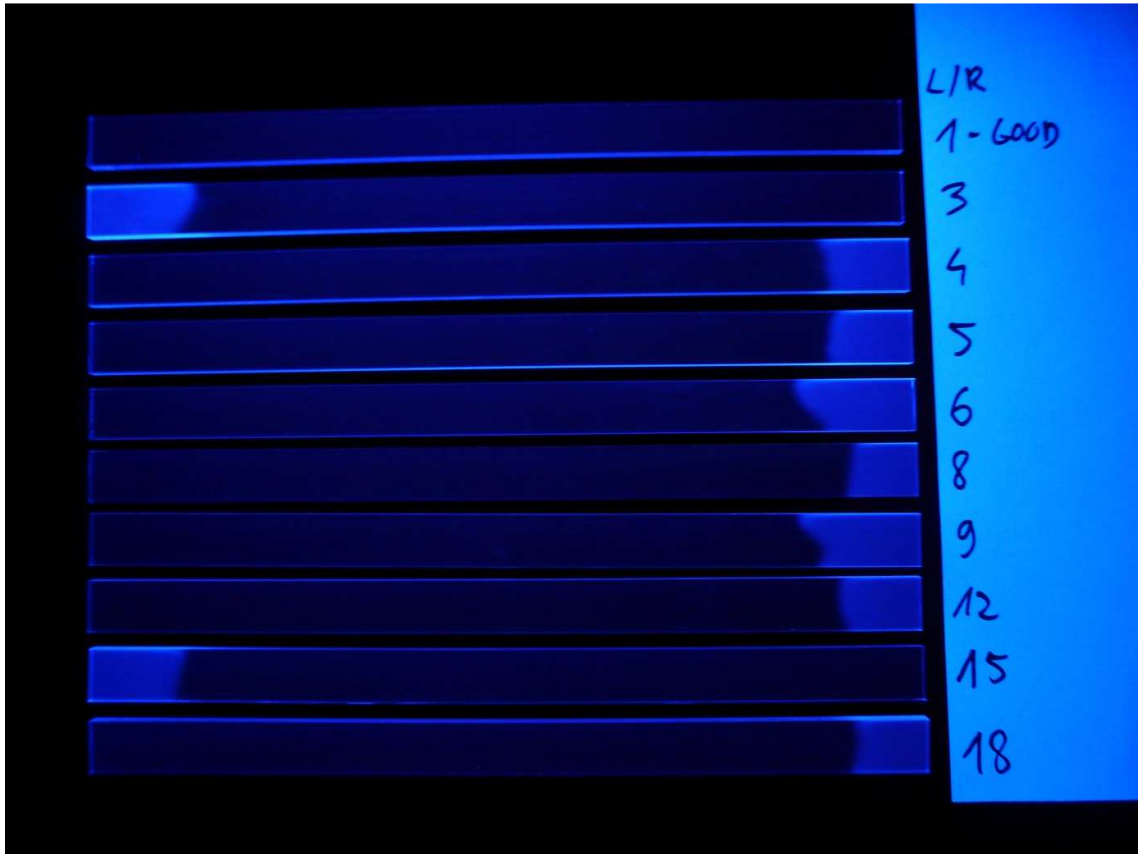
Strips with surface defects seen under UV light: stains – glowing areas with random shapes; probably from sticky removable plastic foil or damages from mold surface
